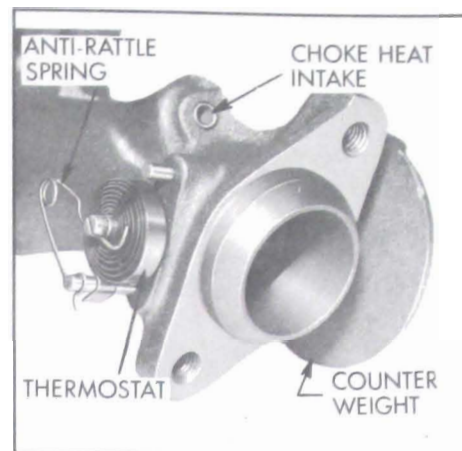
Exhaust Manifold Valve - V-6 Engine
